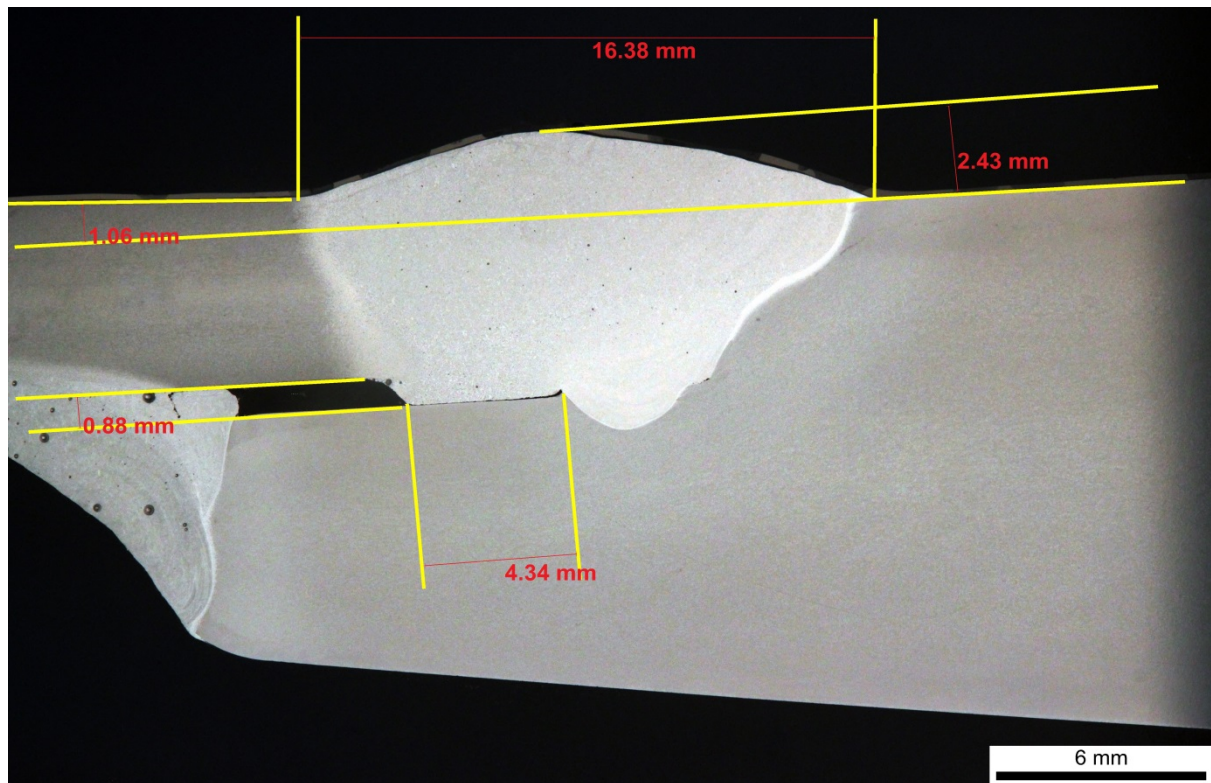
J3564 sample W05-06, slice 4, left hand side of Figure I60. Porosity and a small crack-like defect in the internal fillet weld.
